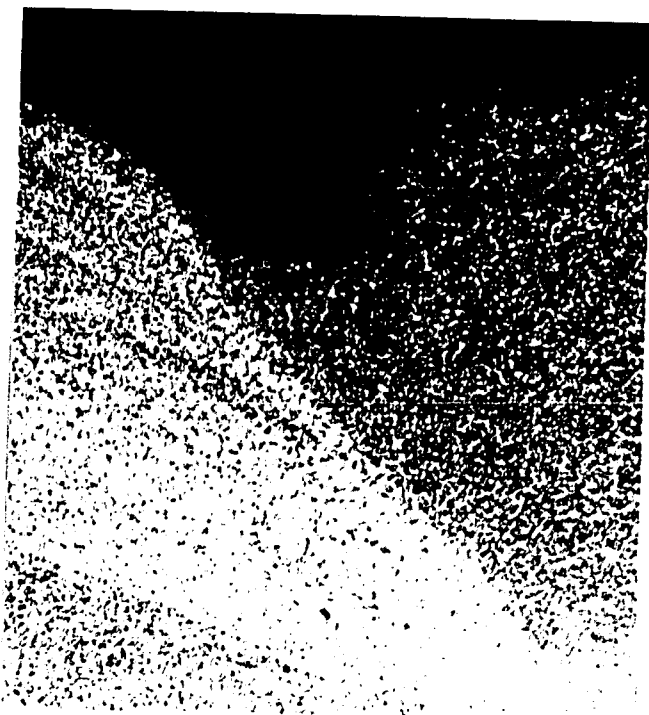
Photomicrograph showing the defect in region "B" on Fig. 62. Note the sharp corner of this defect which lies fully in the weld metal. This defect is believed to be a machining mark which occurred during the trepanning operation of Core KJ.
